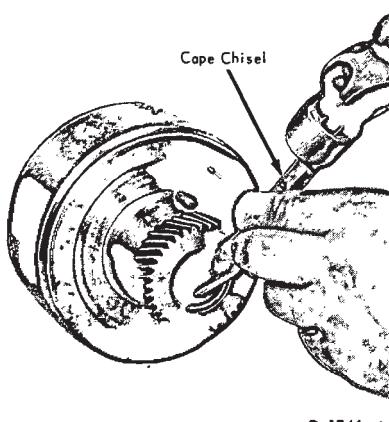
Removing Rear Clutch Sun Gear Bushing
